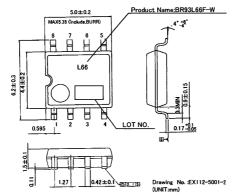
(c) PHYSICAL DIMENSION SOP8 (BR93L66F-W)
